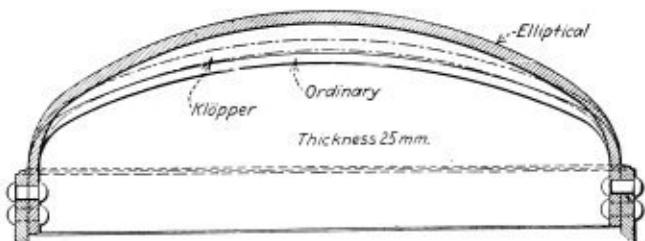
Sections of head tested. Thickness 25 mm. or 0.98 inch
